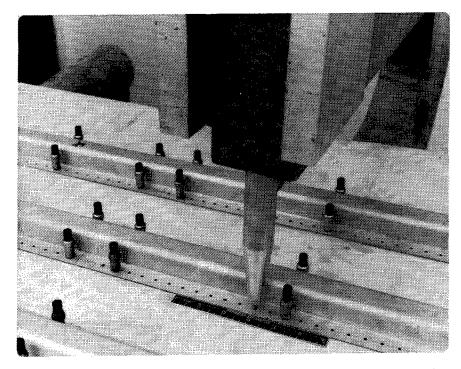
Closeup View Showing Punch Transferring the Hole pattern from the Stringer to the Skin.
